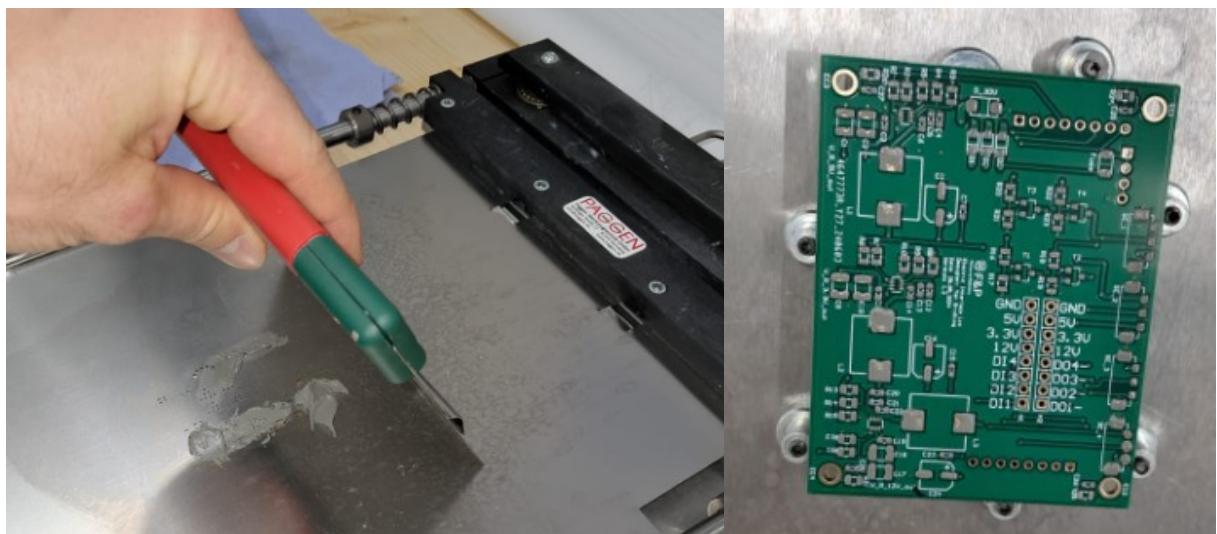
Applied Solder Paste on PCB [Own Illustration]
